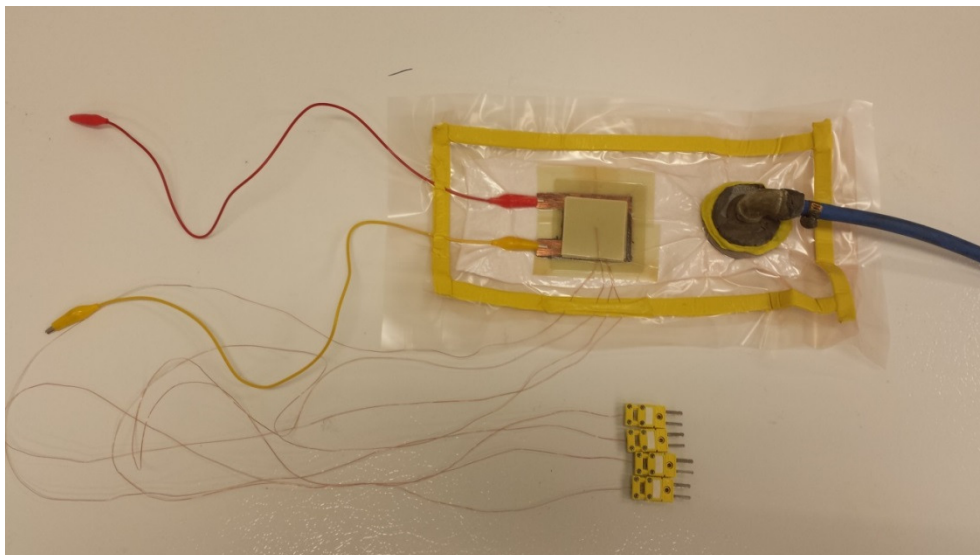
Single 5-layer carbon fabric specimen in the vacuum bag
